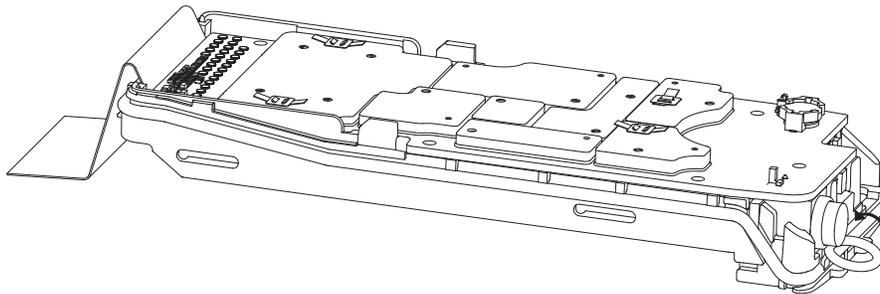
Assemble the Main O-Ring at Antenna Holder
